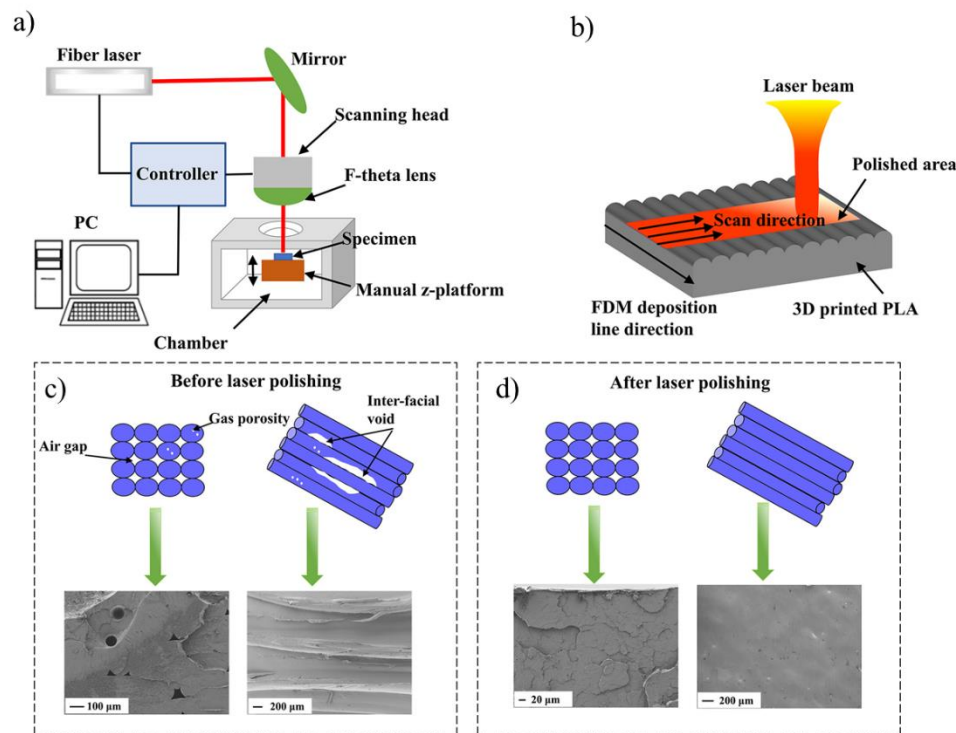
Schematic illustration of (a) experimental setup for laser polishing, (b) the remelting mechanism and laser scanning direction, (c) defective printed PLA specimen, and (d) perfect printed PLA specimen. Reprinted with permission from Ref. [47]
